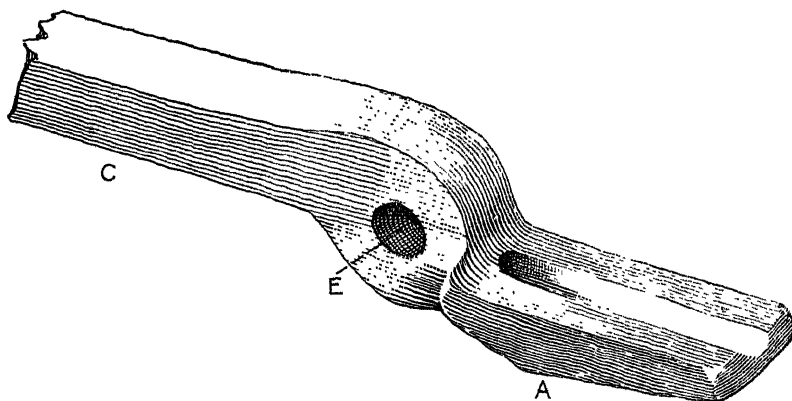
The third stage. The jaw is completely formed, the end C is drawn down in readiness for welding on the handle, and the hole E is punched.
